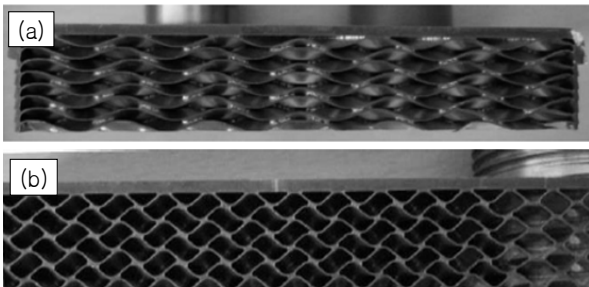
Cross section of a brazed plate heat exchanger (a) front (b) side view.
